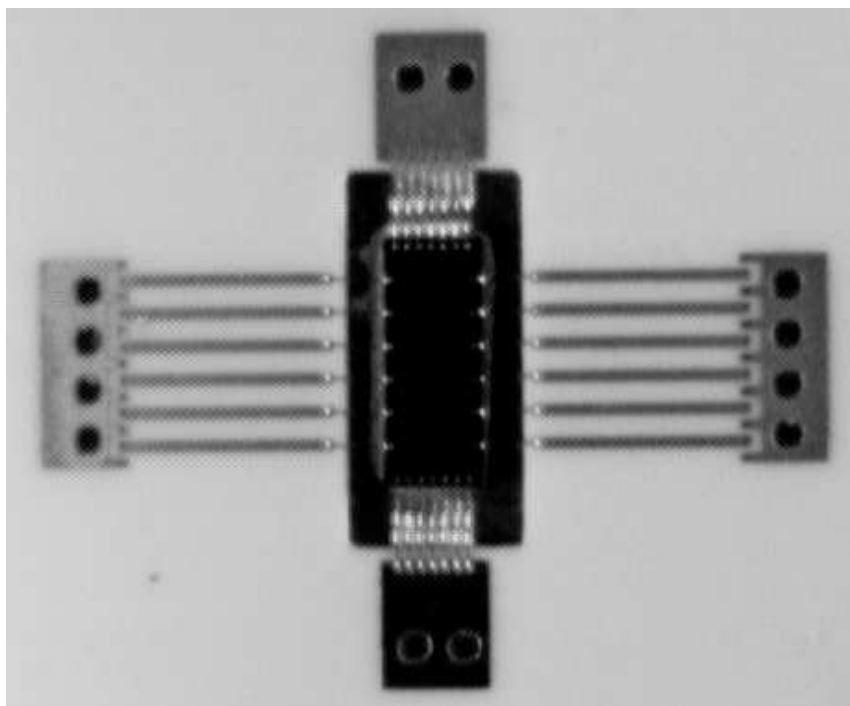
Photomicrograph of the test chip mounted in the test fixture.
